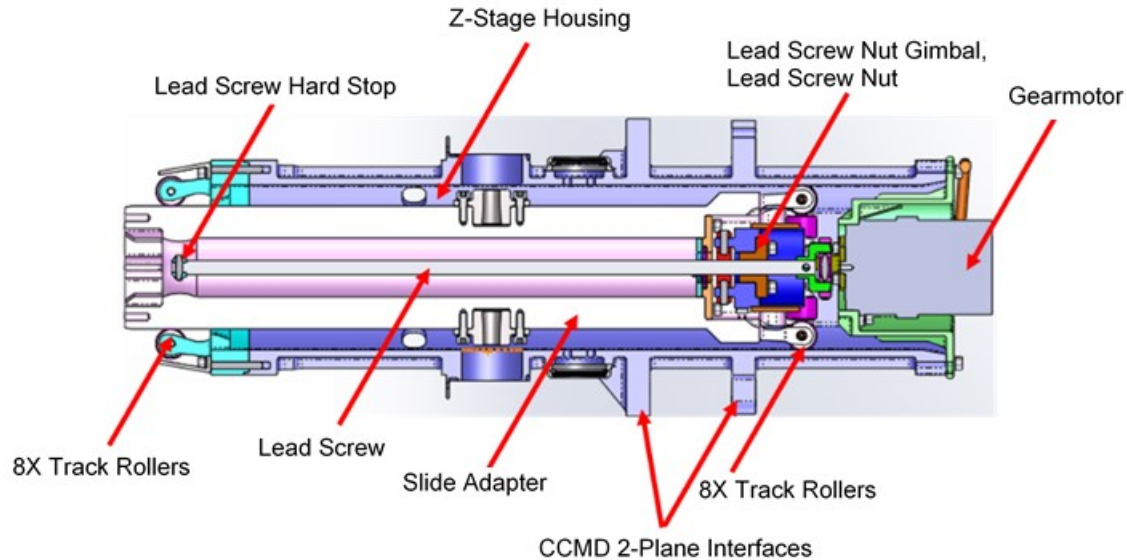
SHA Z-Stage Cross-Section (shown sideways).
